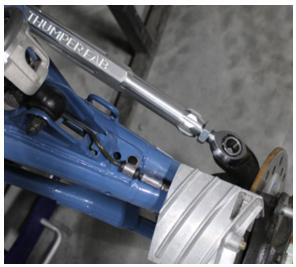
Thread Jam Nut (4) onto Heim (3) and thread into Billet Tie Rod (1)
